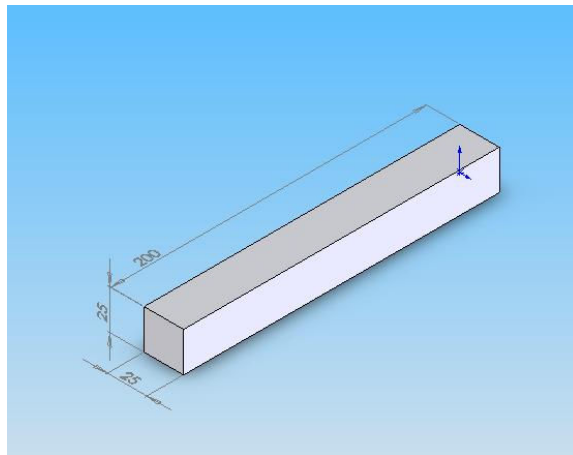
Part drawing 1 (Fixed Vertical Bar)
